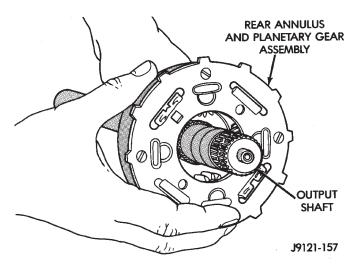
Installing Rear Annulus And Planetary On Output Shaft
